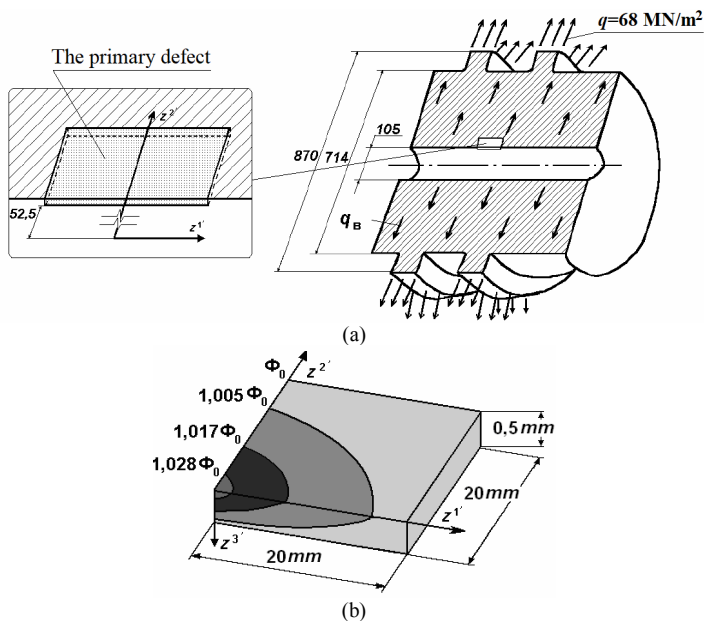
The steam-turbine rotor with the primary defect (a) – general view, (b) – model of defect
